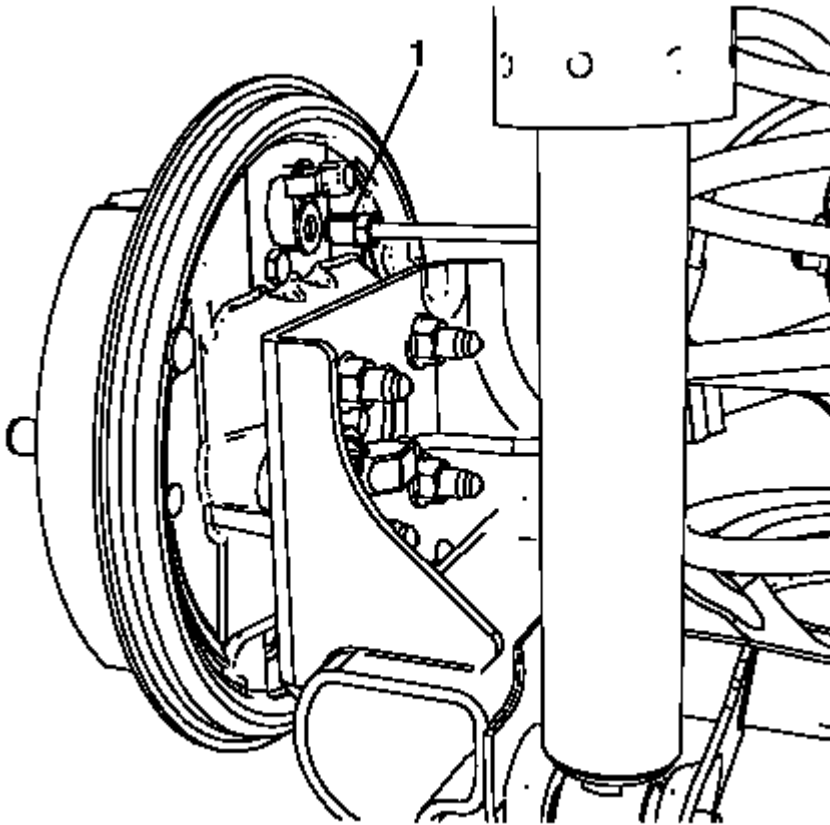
Wheel Cylinder Brake Pipe Fitting
